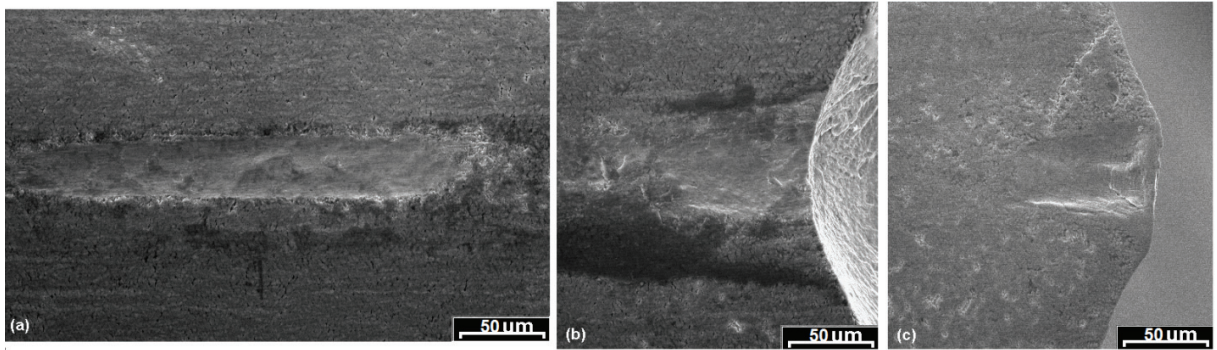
Wire contact surface. (a) Austenite (no fracture); (b) partially stress induced martensite; (c) fully stress induced martensite. Loading direction is horizontal and fracture surface in plane in (b) and (c) is approximately normal to the page. Fretting marks on the lateral surface are related with fatigue crack initiation points.
